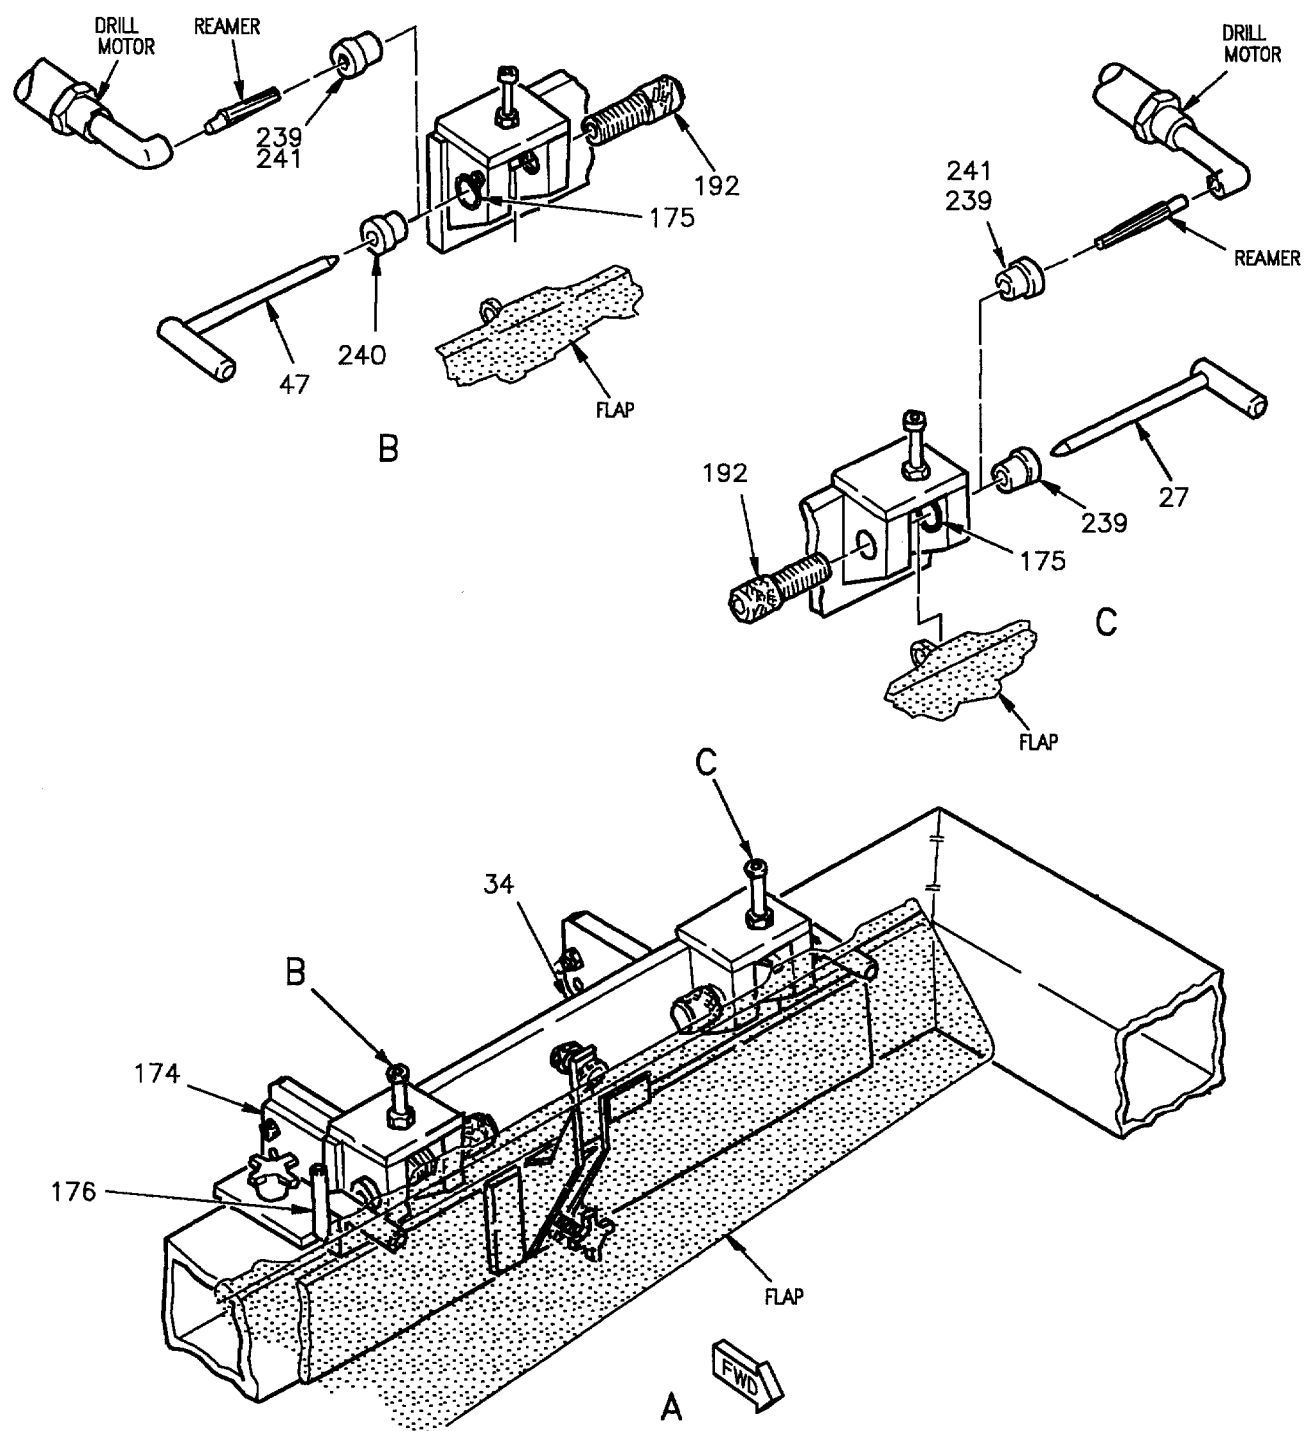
Idler Lug First Oversize Bushing Installation (Sheet 2)
